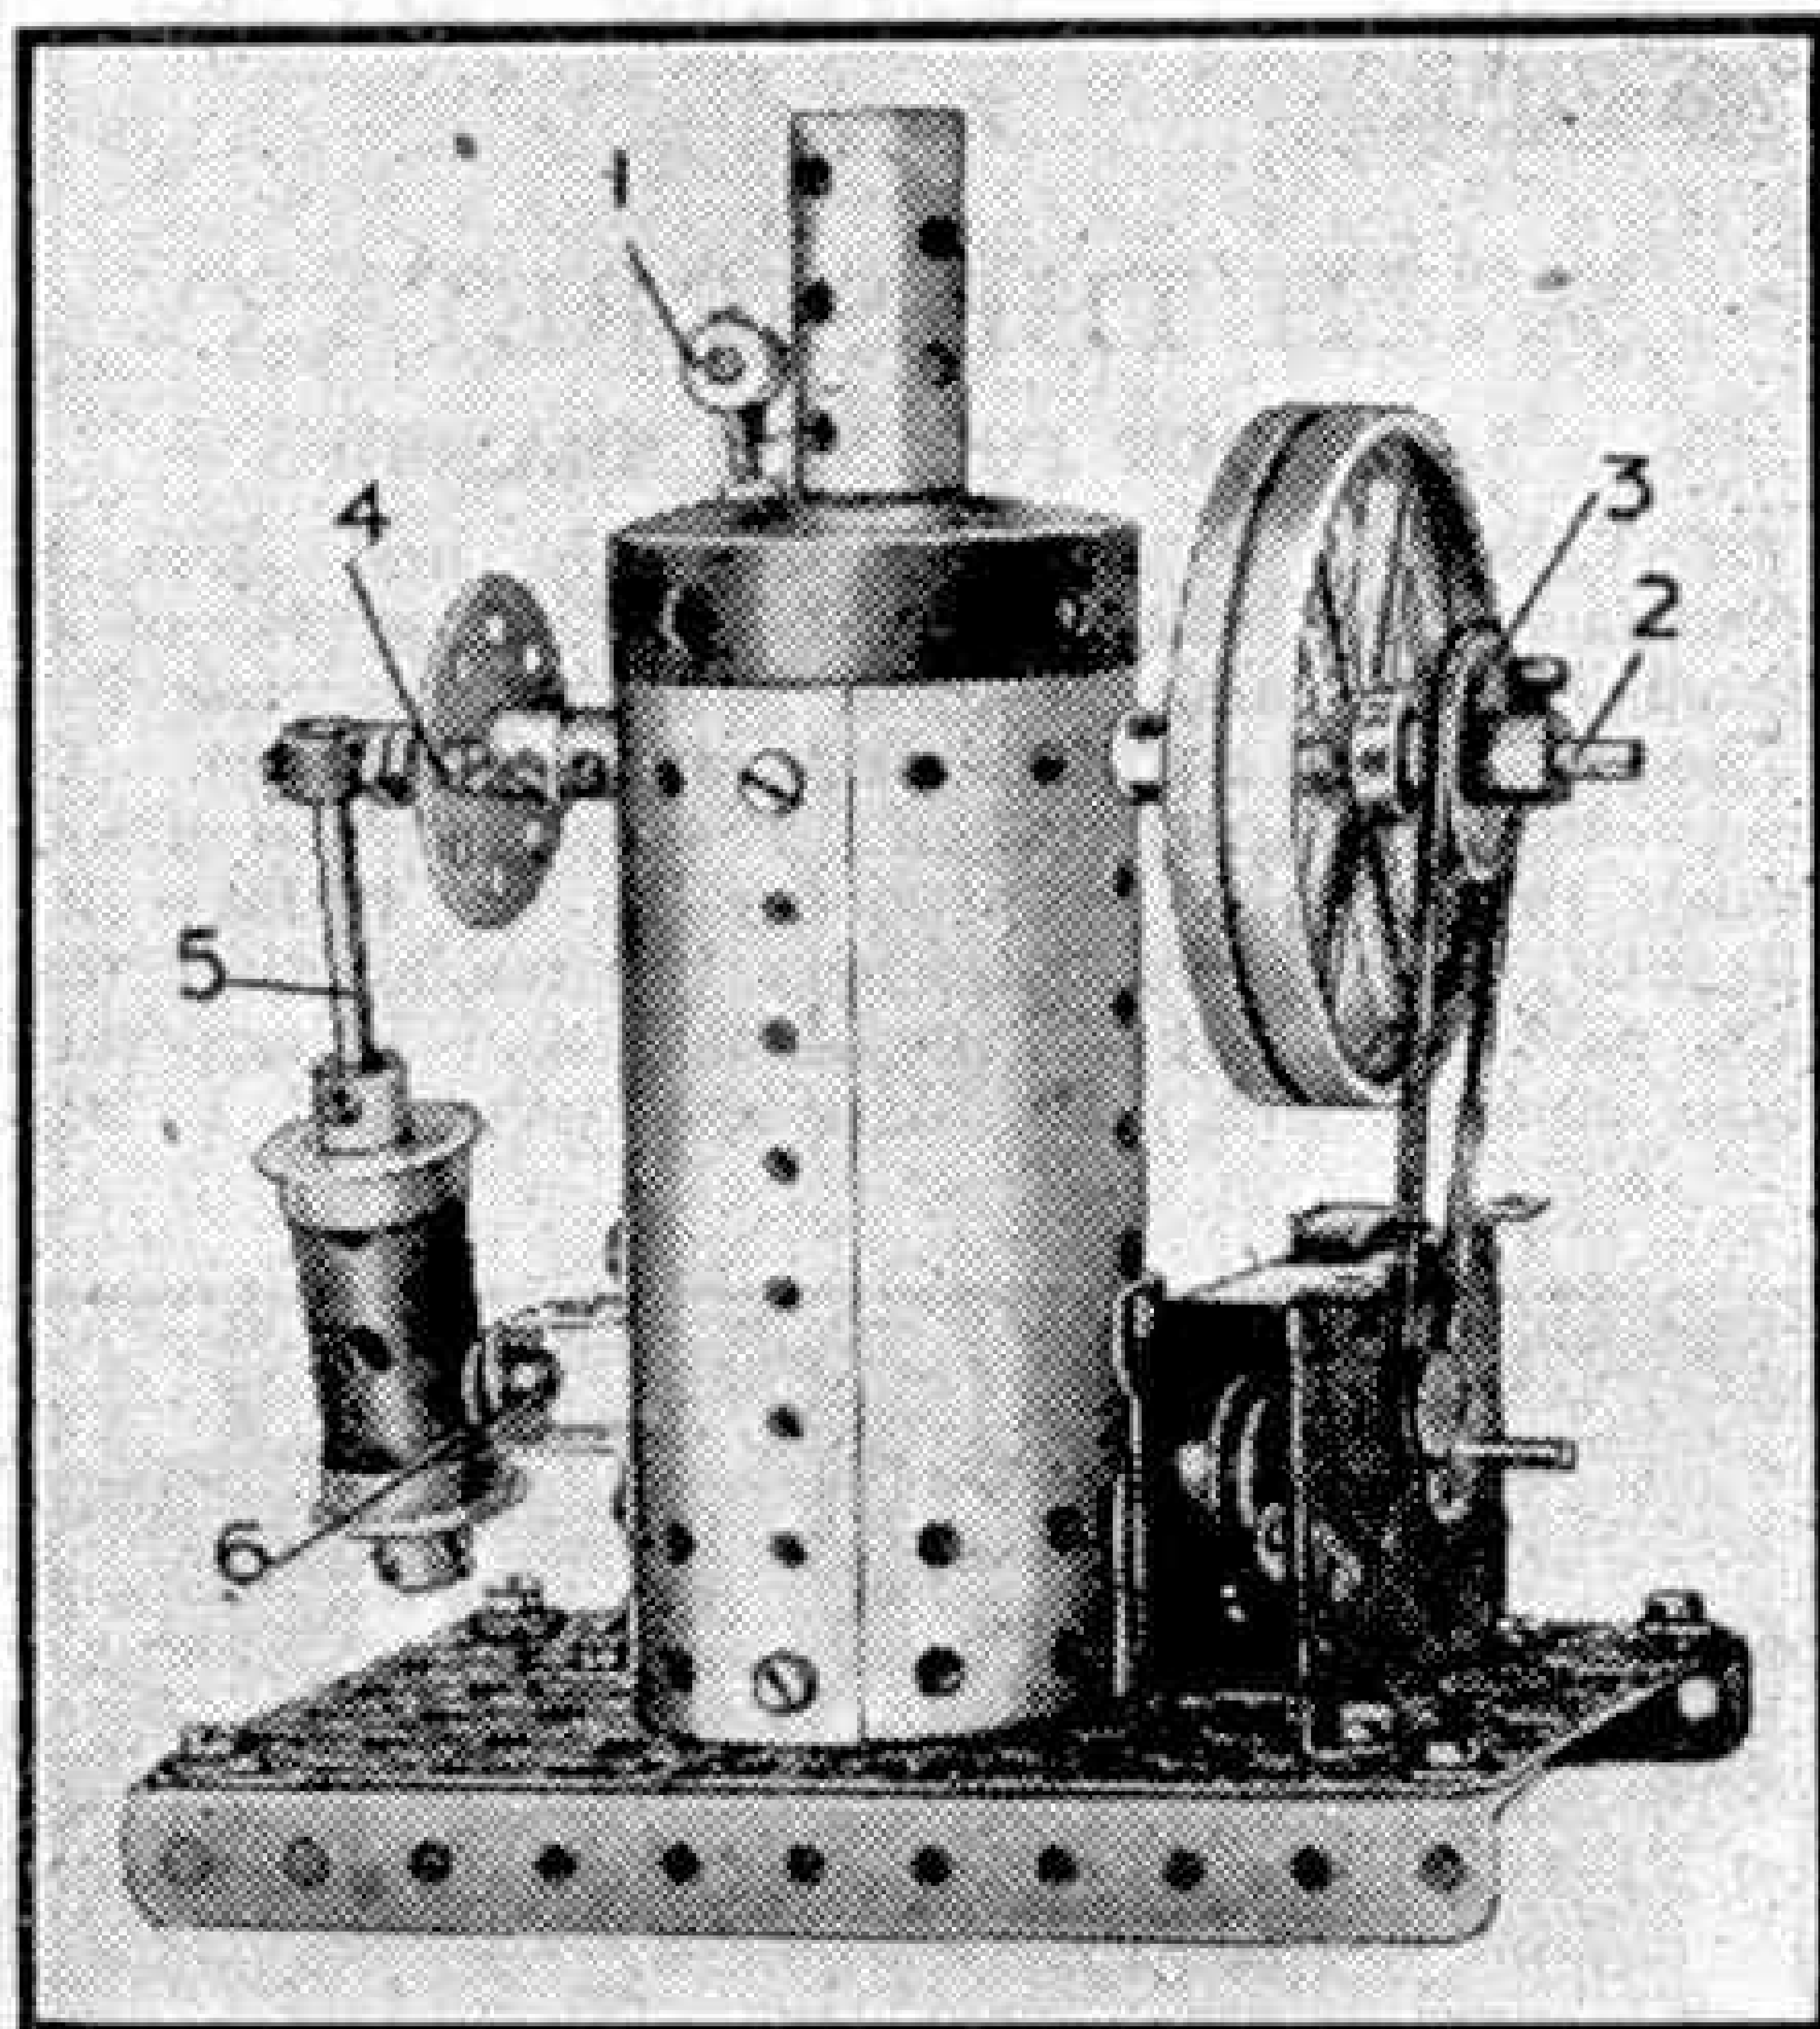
Comparatively few parts are required to build this excellent Meccano steam engine and boiler.
